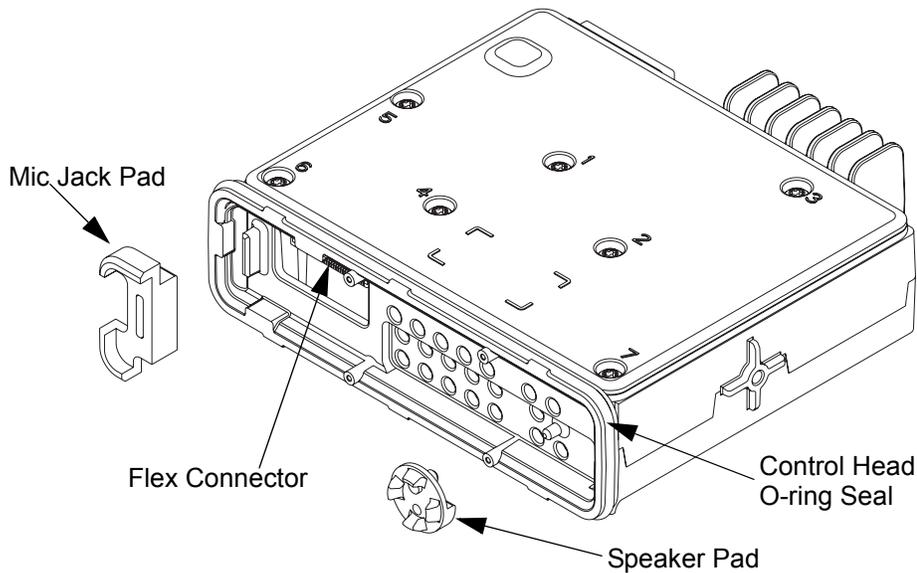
Mic Jack Pad and Speaker Pad on Chassis
